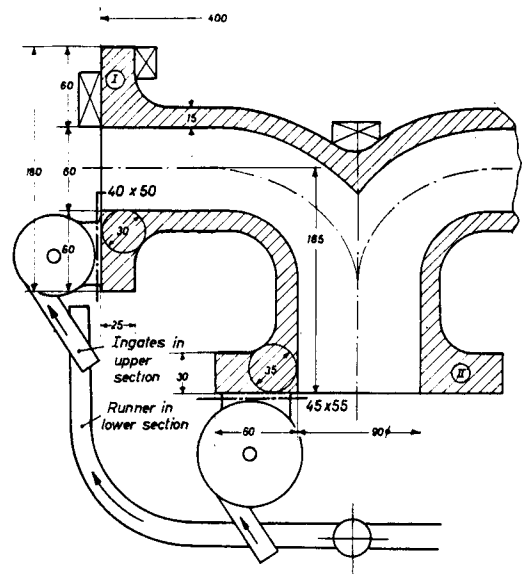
Neck of a distributor casting. Alternative 3: separate, easily removable feeders.
